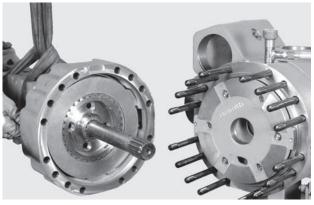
Check integrity and position of the arm's o-ring; install the complete arm.
